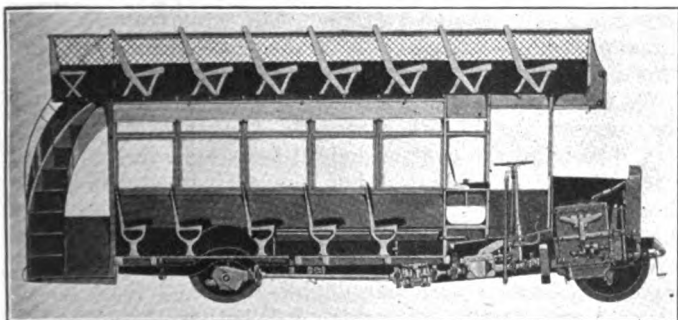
SECTIONAL VIEW OF THE TYPE-L BUS
